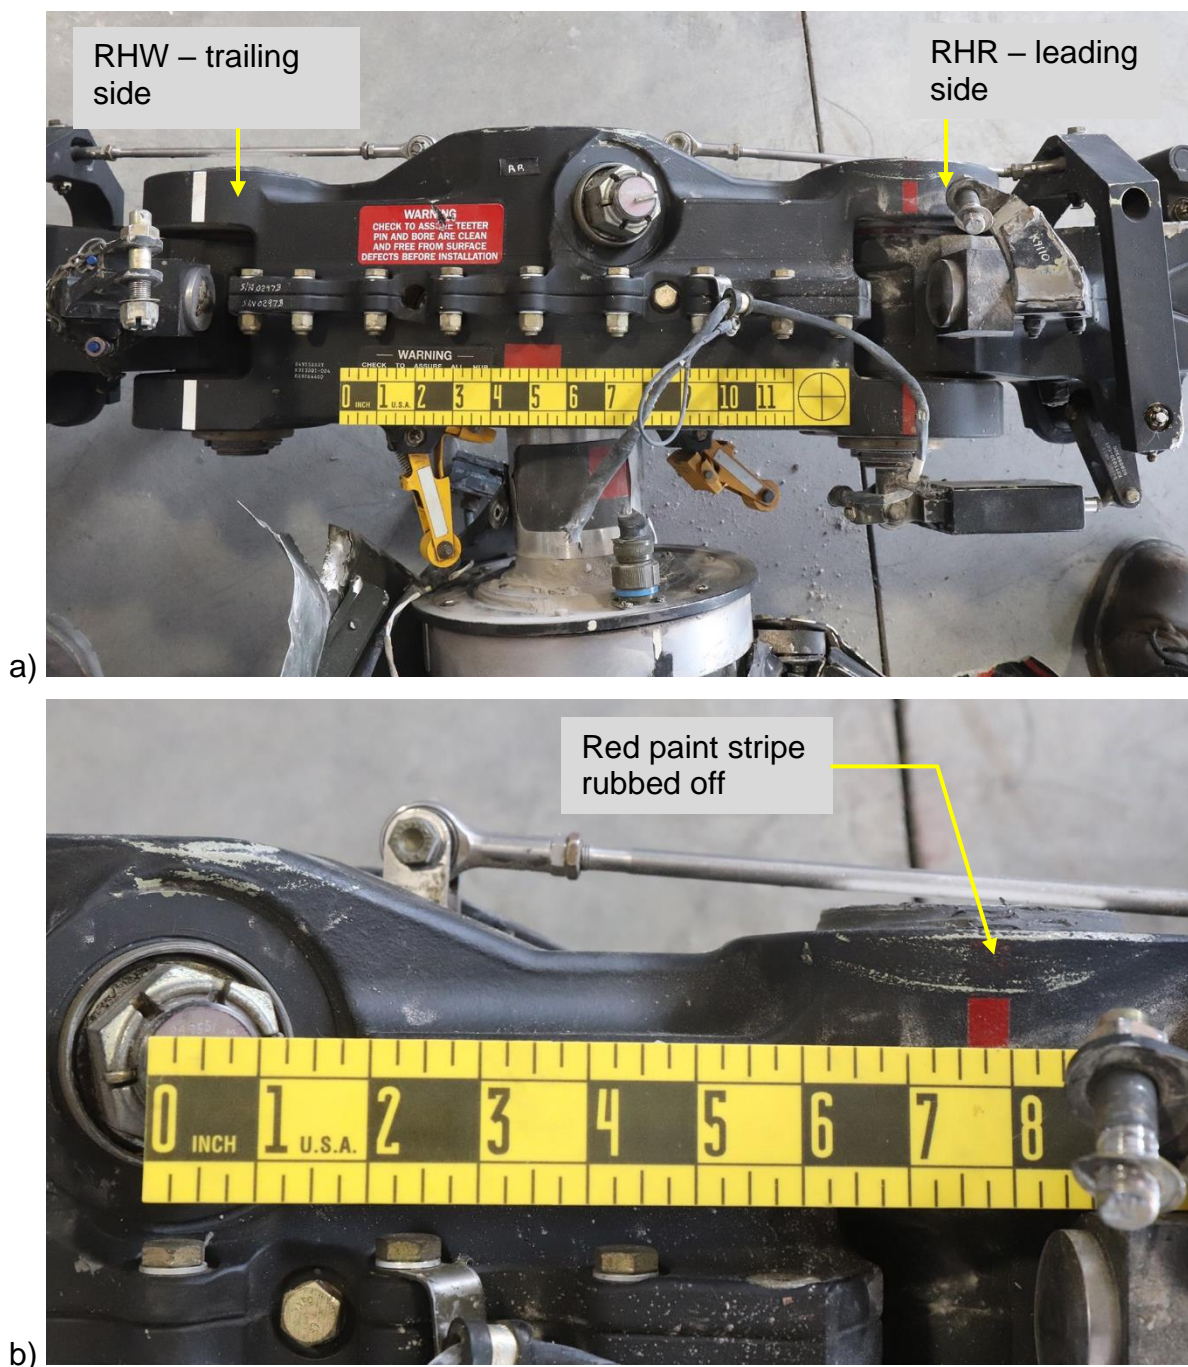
a) Image of the right rotor hub. The white blade (left side) rotates into the page and the red blade (right side) rotates out of the page; b) image indicating where the red paint stripe had been rubbed off the hub's red blade hinge pivot.
